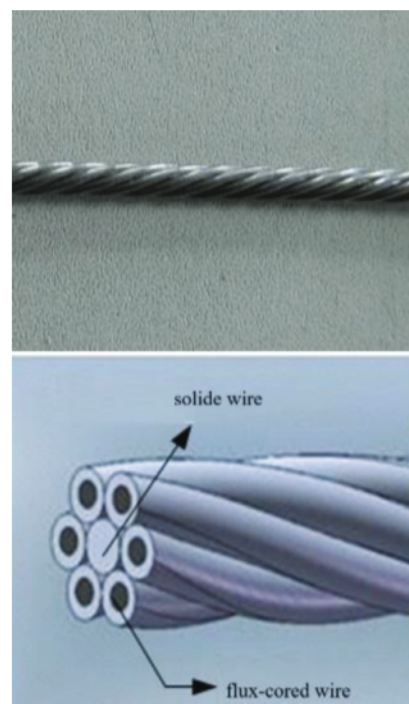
Cable-type welding wire and its cross-section: a) cable-type welding wire, b) cross-section
